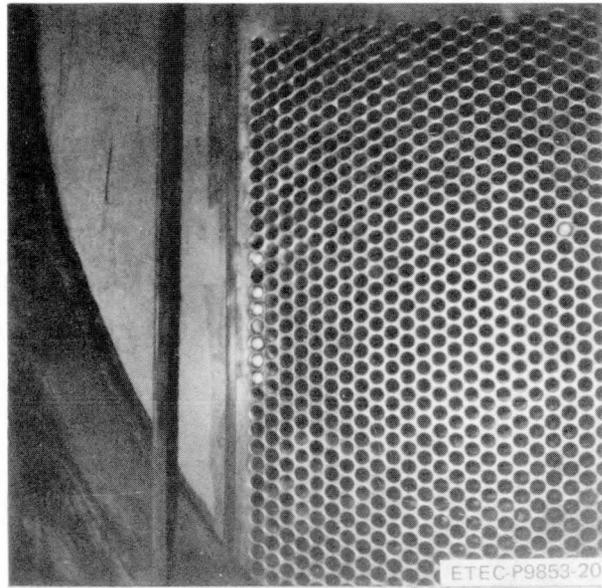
Inlet Bottom Tubesheet, Starboard Side
